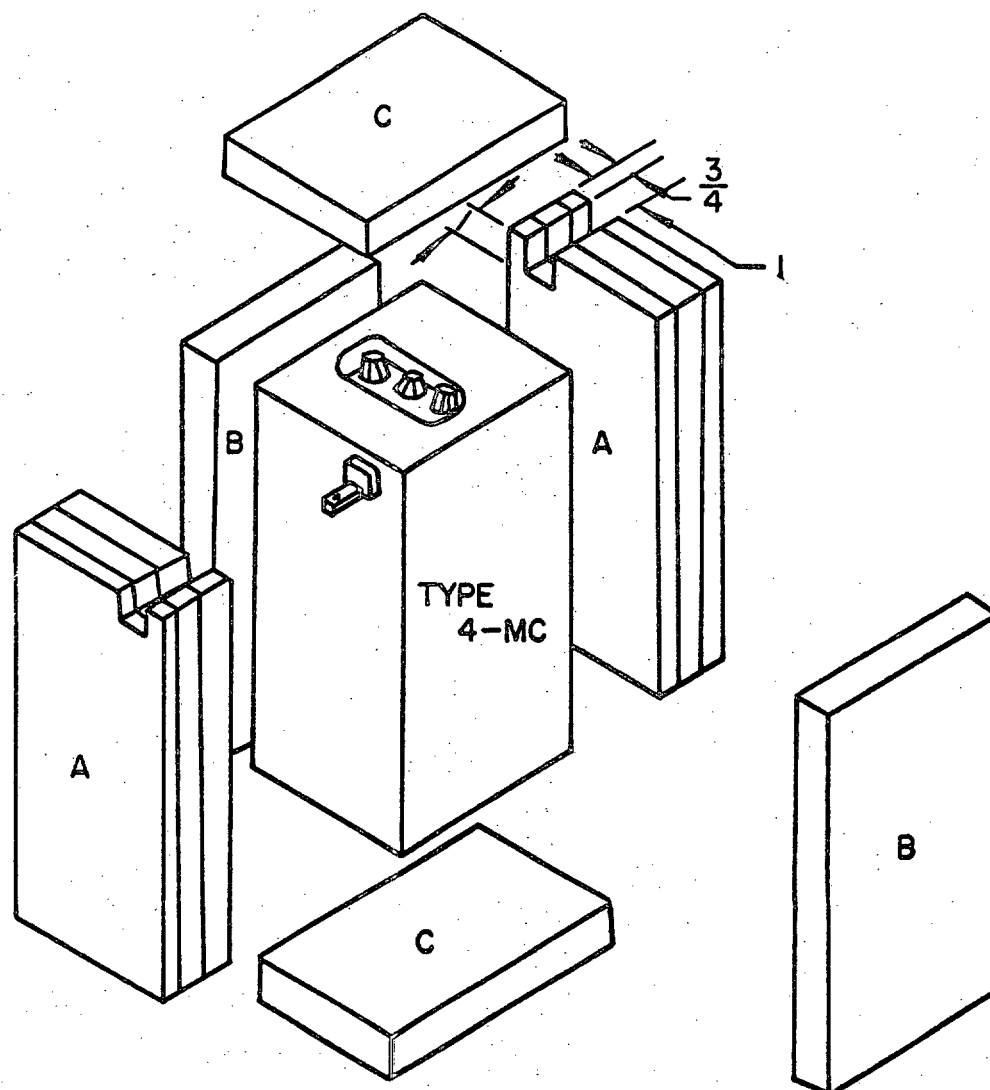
TOP FRAME AND FILLER PAD ASSEMBLY
